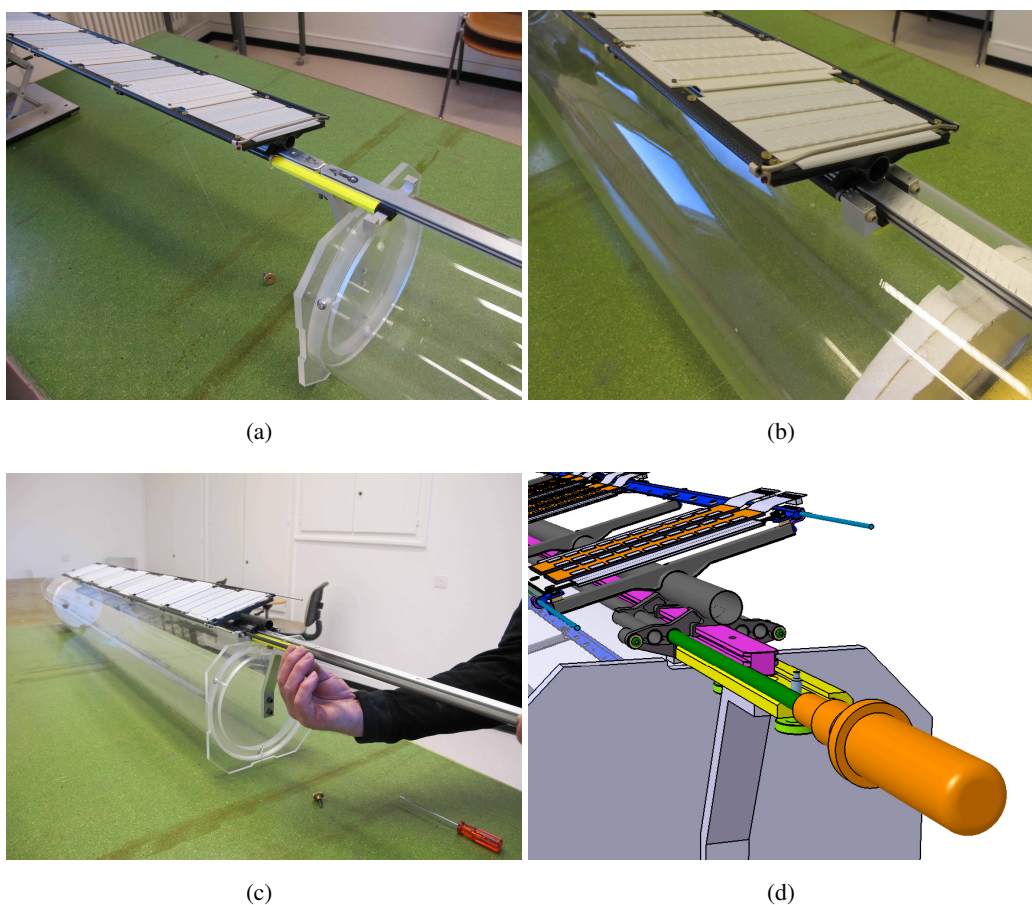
(a) The prototype SM on the temporary guiding rail, before being slid into position on the prototype GS cylinder. (b) The prototype SM after being slid into place but before locking. The $z = 0$ locking point is clearly visible. (c) Locking the SM in position with a long insertion tool guided by small CFRP tubes attached to the LS. (d) A 3-dimensional CAD view of the insertion tool guided by small cylindrical tubes on the LS.
